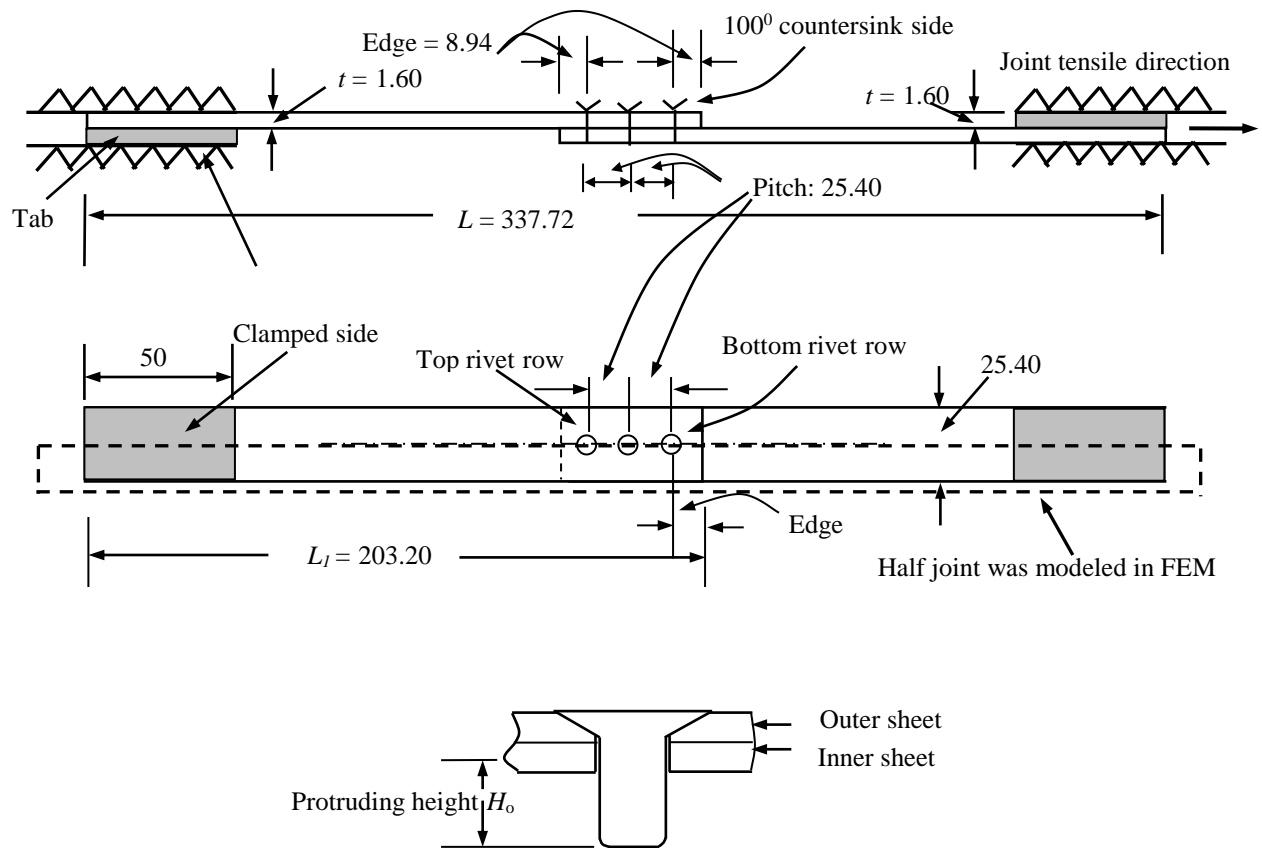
Diagram of the lap joint with three countersunk rivets (dimensions: mm).
